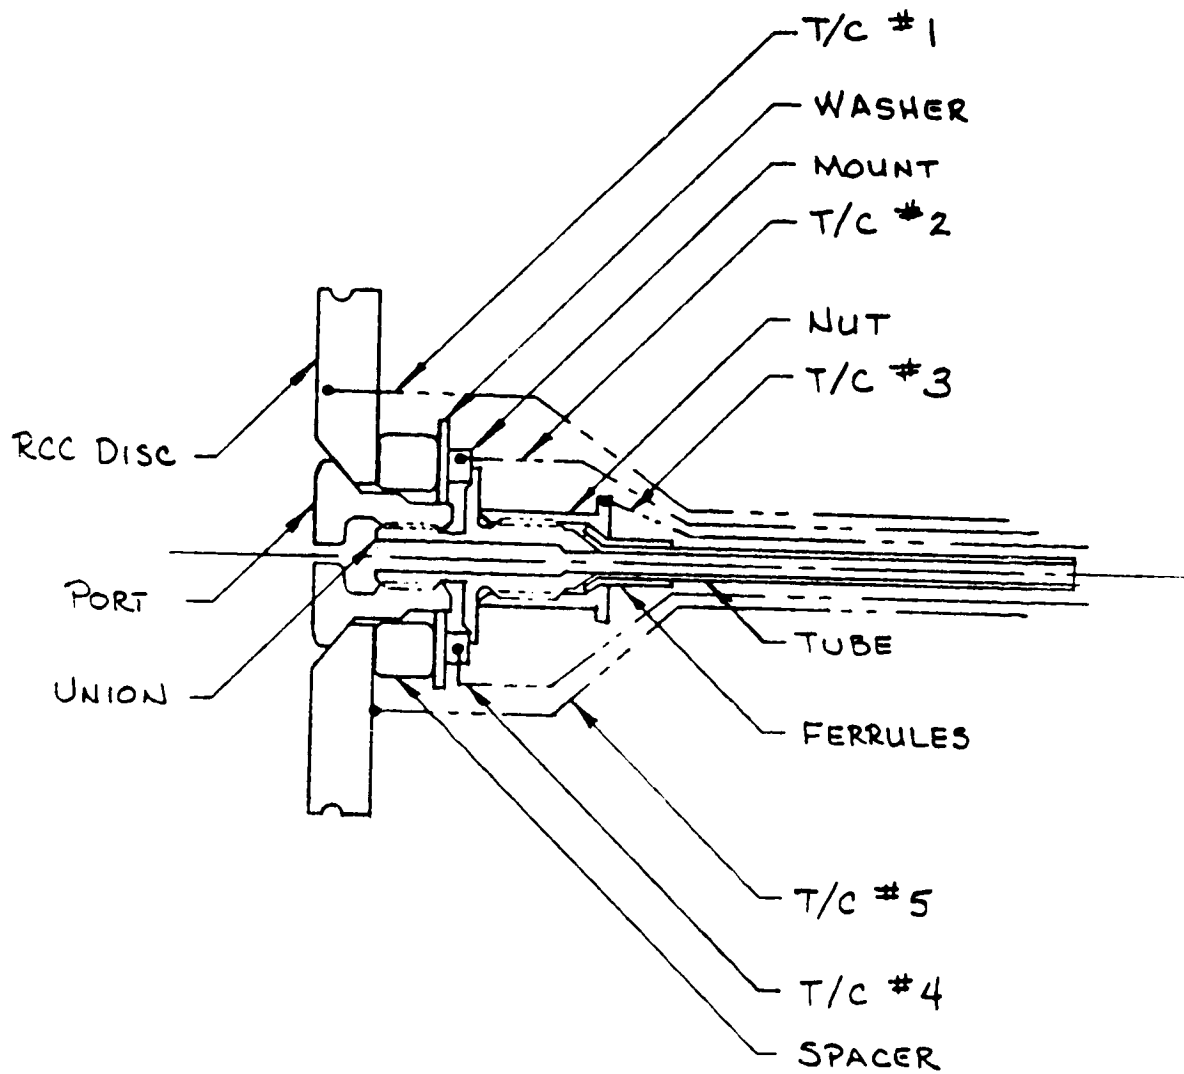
SEADS PENETRATION TEST ASSEMBLY
